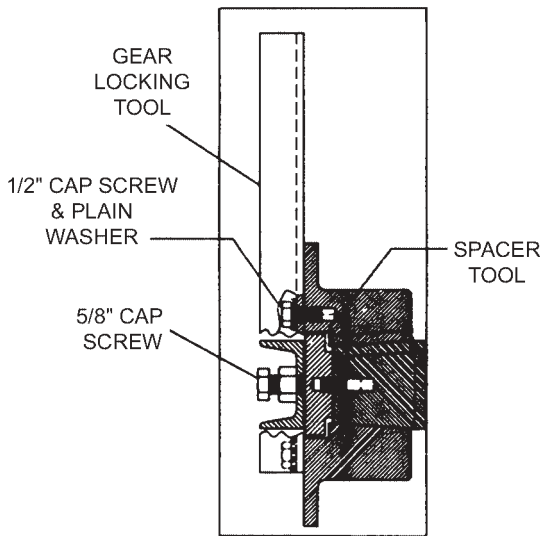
HIGH-SPEED REVERSE THRUST BEARING
